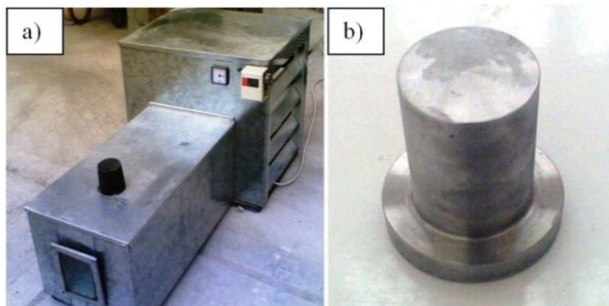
a) Temperature adjusting apparatus, and b) Loading fixture.
